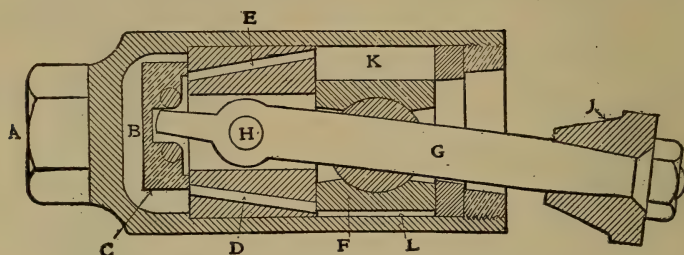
Mechanical Tube Cleaner — Hammer Type.
